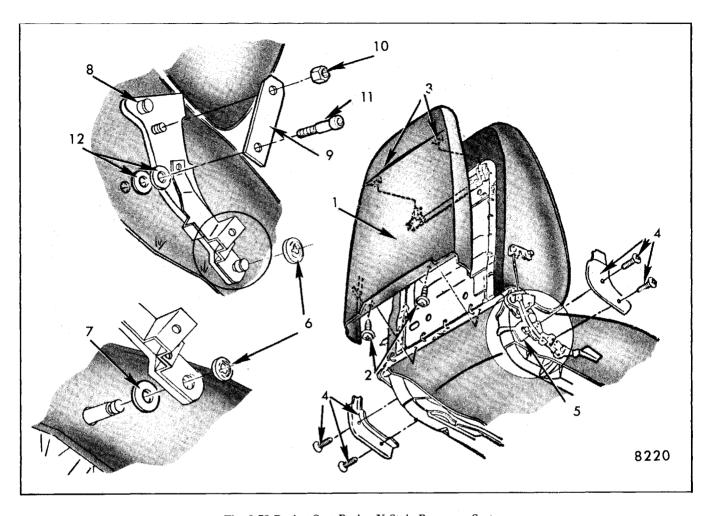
Bucket Seat Back - X Style Passenger Seat
